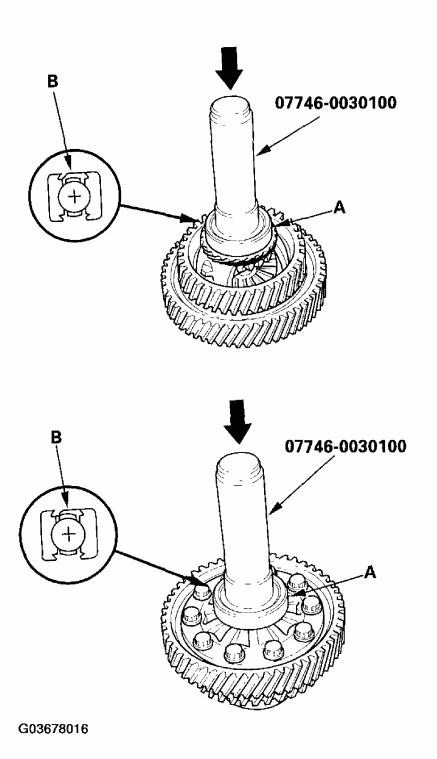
Installing Bearing Courtesy of AMERICAN HONDA MOTOR CO., INC.
